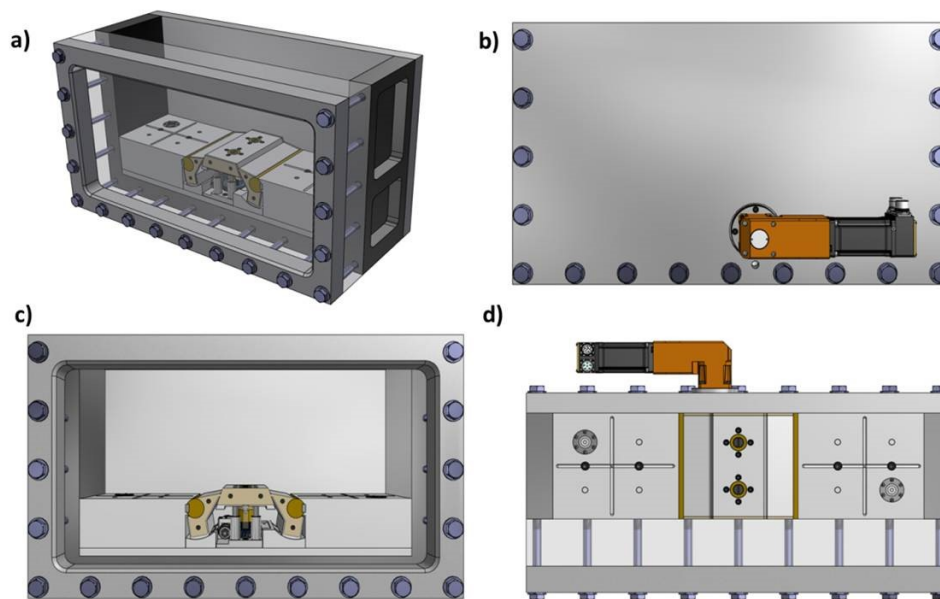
Schematic view of GeoCDM a) isometric view b) back view c) front view d) top view.
